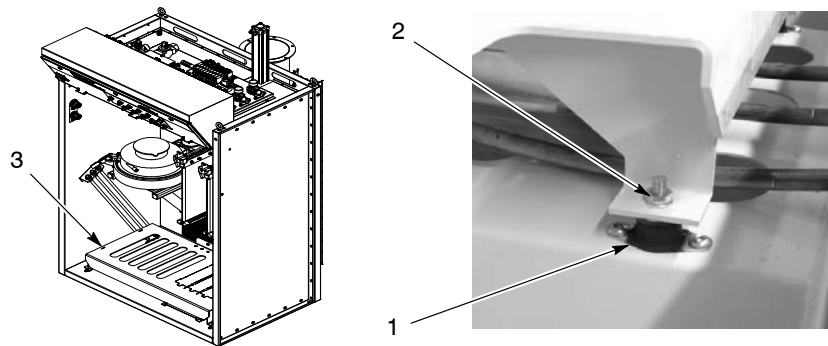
Hopper Box Table Removal (Encore Powder Feed Center Shown)
